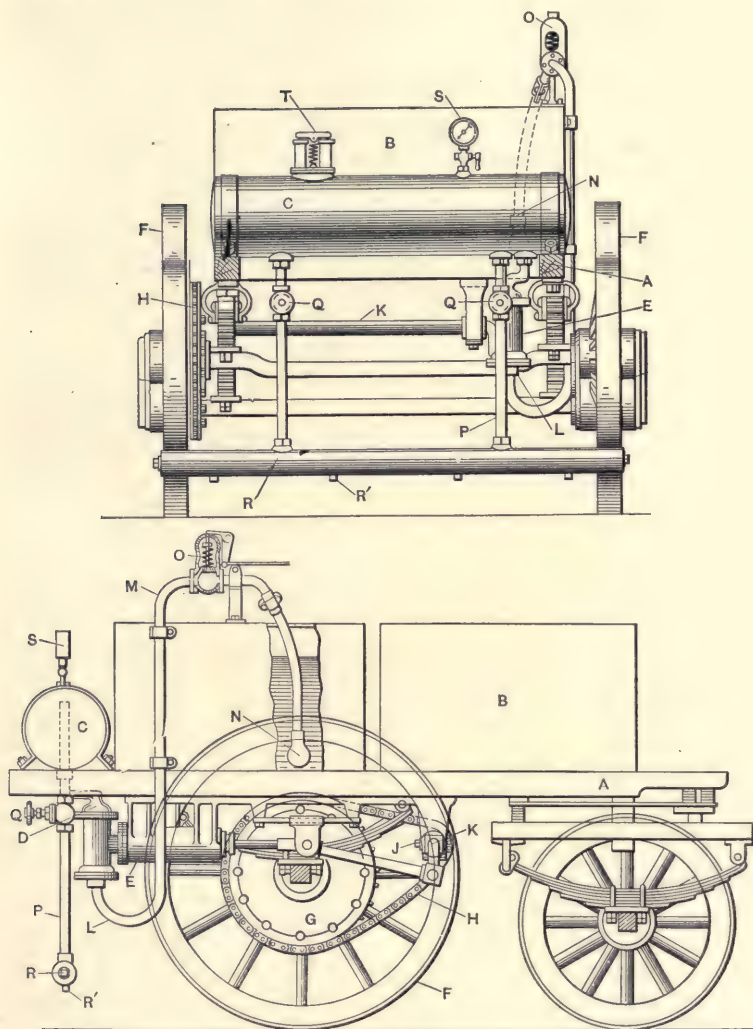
Sketch of Pneumatic Tar-Spraying Machine.
